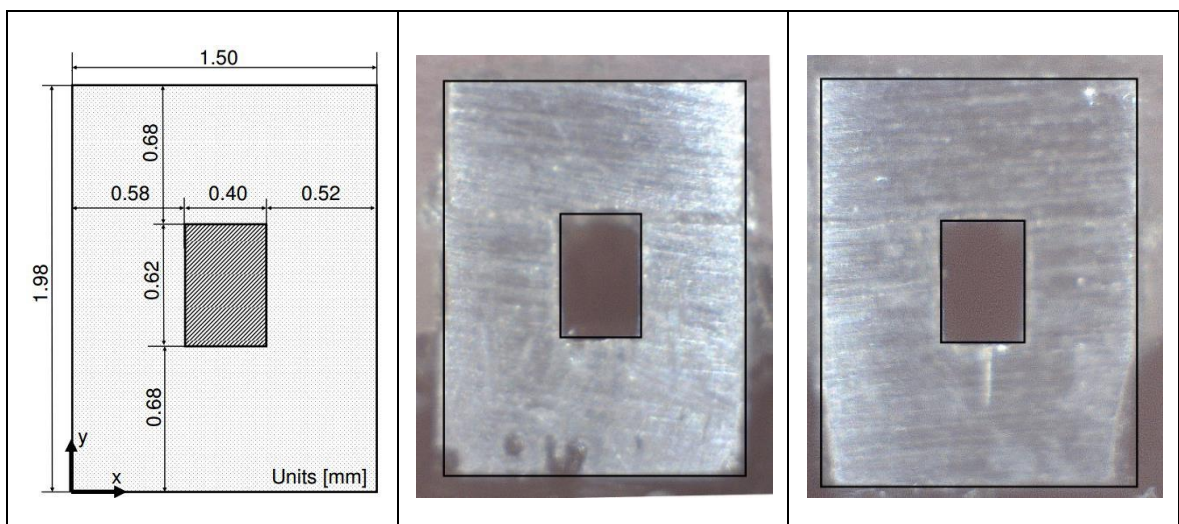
Test Section 3: (a) actual measured channel dimensions, (b) photograph of inlet side of the channel and (c) photograph of the outlet side of the channel
